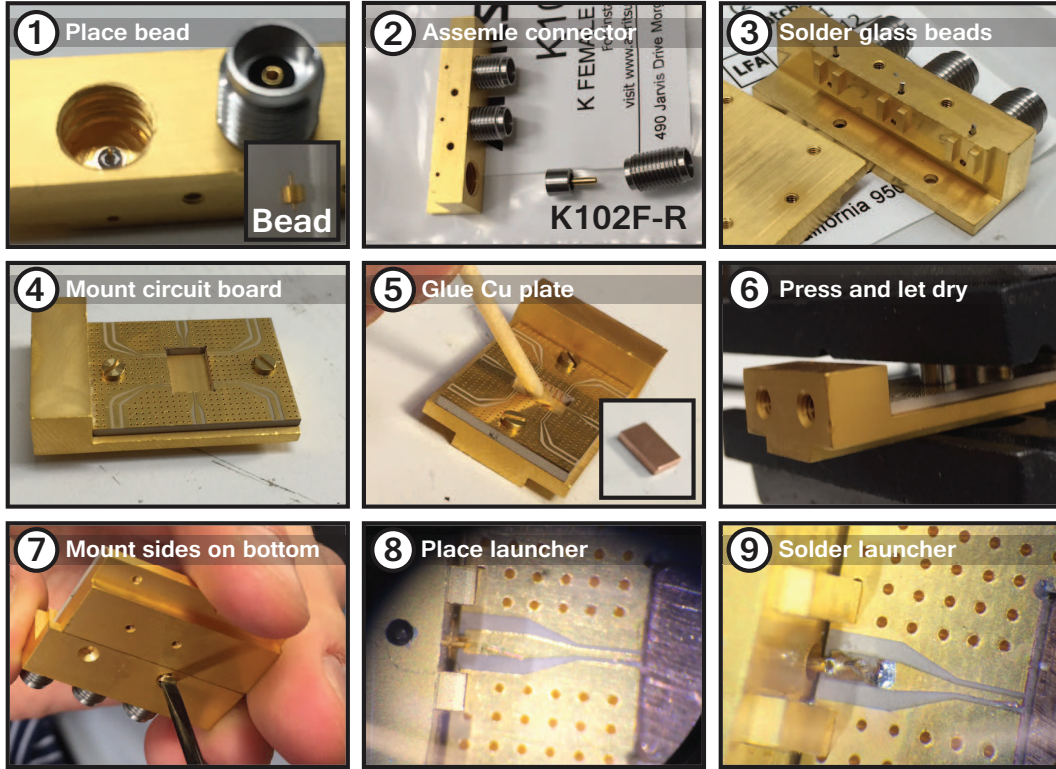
The sample box assembly step-by-step. ① Place the glass bead (Huber & Suhner) into the milled out pits, such that the "body" of the bead is aligned with its surrounding edges. Important here is to let the long side of the pin face the K-connector. ② Screw in the two pieces of the K-connector (Anritsu K102F-R) and make sure that it is properly tightened. If not, the connector might come out later when disconnecting an attached wire. ③ Solder the glass beads by feeding down a small piece of solder into the solder pits. Place the whole side on a hotplate until the solder has melted into the pits. This usually take about 1.5 min @ 300°C. If heated for too long time, the gold will diffuse into the Cu. ④ Mount the printed circuit board onto the bottom plate using two M1.6 screws. ⑤ Put some glue in the milled out sample position and place a piece of Cu inside of the pit. This Cu will help to thermalize the sample by anchoring it to the sample box. ⑥ Place the bottom piece in a vise and press using a proper spacer and let the glue dry. ⑦ Mount the two side pieces on the bottom piece. Here, the M1.6 screws used need to be filed down to ensure that they do not reach the PCB on the other side. ⑧ Place microstrip launchers (Anritsu K110-1-R) on the pins from the inside of the box. Make sure that they slide on to the pin properly and that its "lip" reaches the center conductor of the PCB waveguide. ⑨ Solder the launcher to the PCB and test measure the whole connector, making sure that the center conductor is not shorted to ground (outside of the box).
